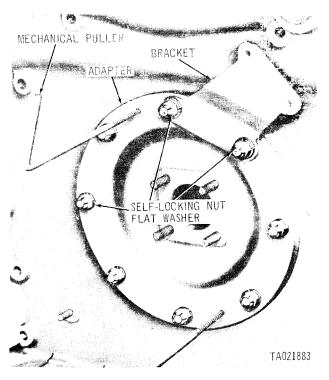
Removing or installing fuel pump adapter using mechanical pullers, model AVDS-1790-2C and AVDS-1790-2D engines.
